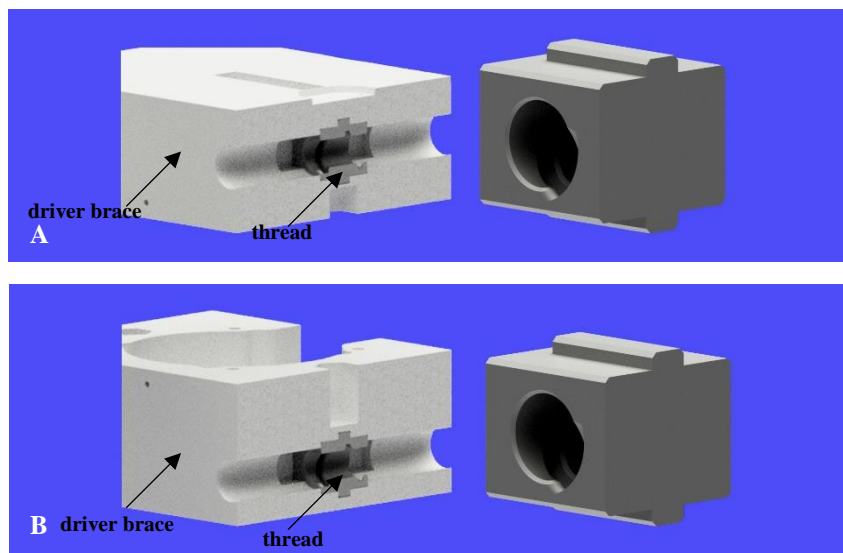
(A)Section view: Driver brace with Thread, Thread (B)Section view: Driver brace with Thread, Thread
